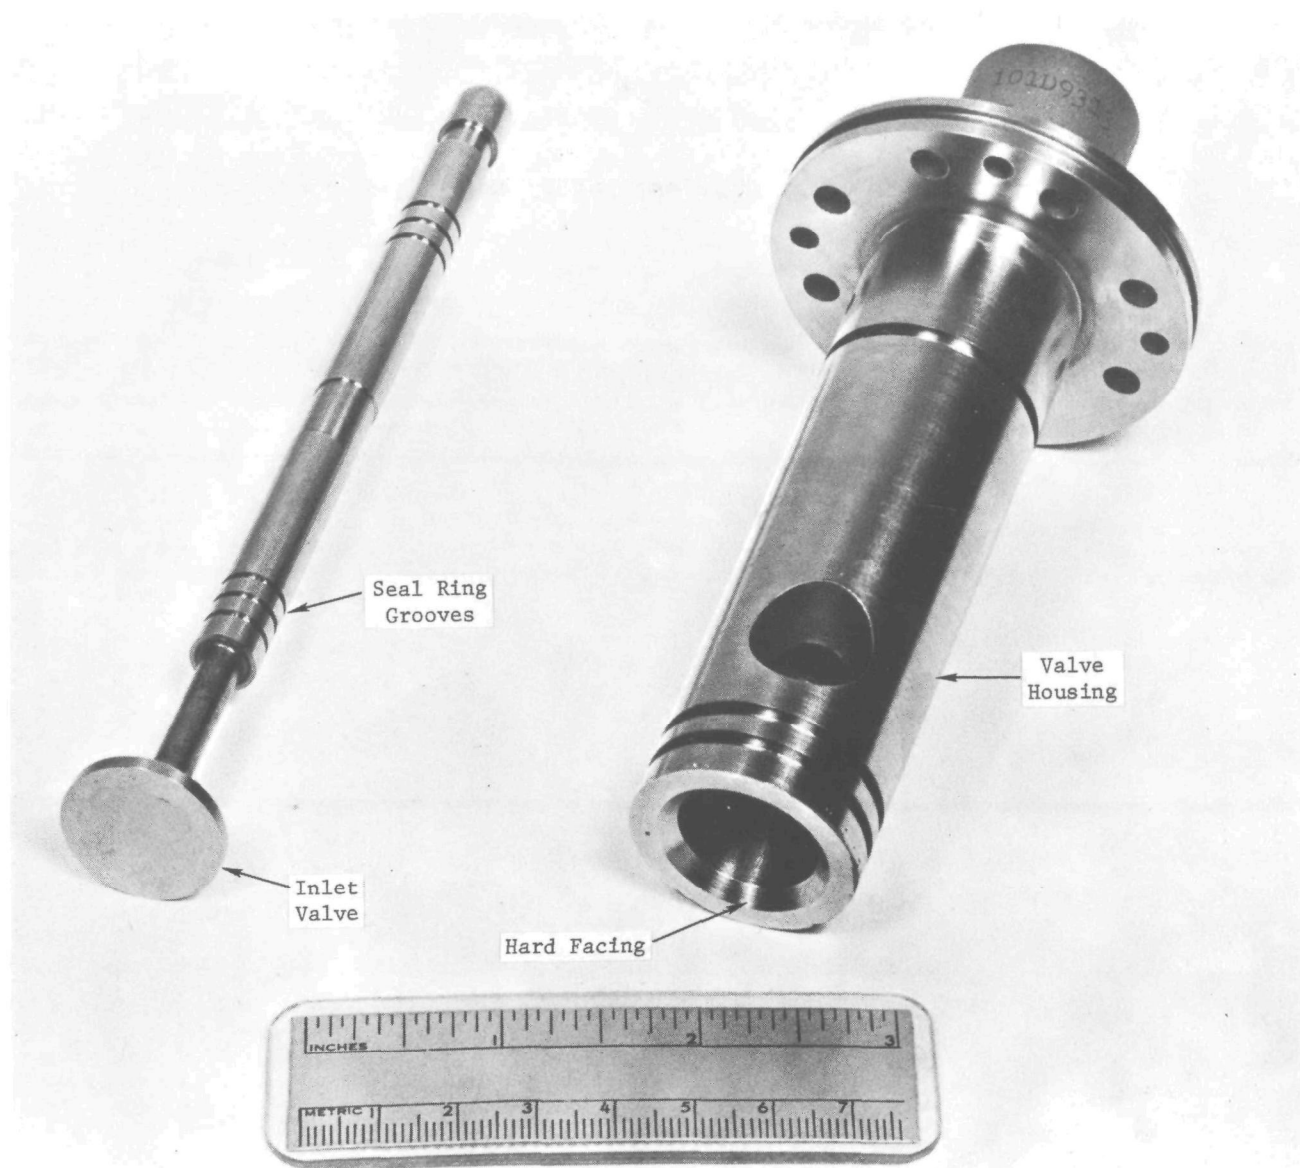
Steam Inlet Valve Assembly (P72-3-4F).
